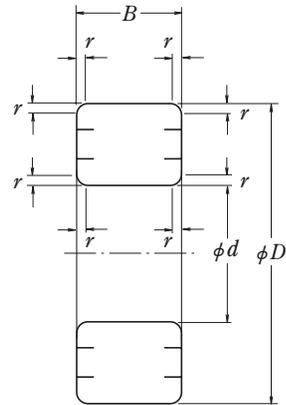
Boundary Dimensions of Radial Ball and Roller Bearings
